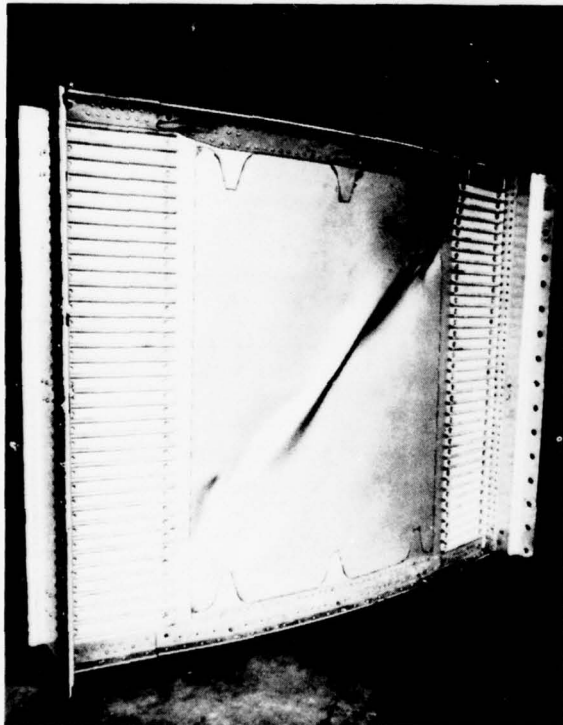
SHEAR AND COMPRESSION FAILURE - FRONT VIEW
